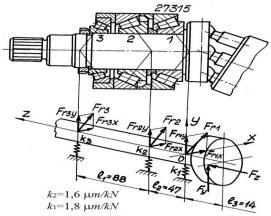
Scheme of a bearing arrangement consisting of duplex tapered roller bearings.
